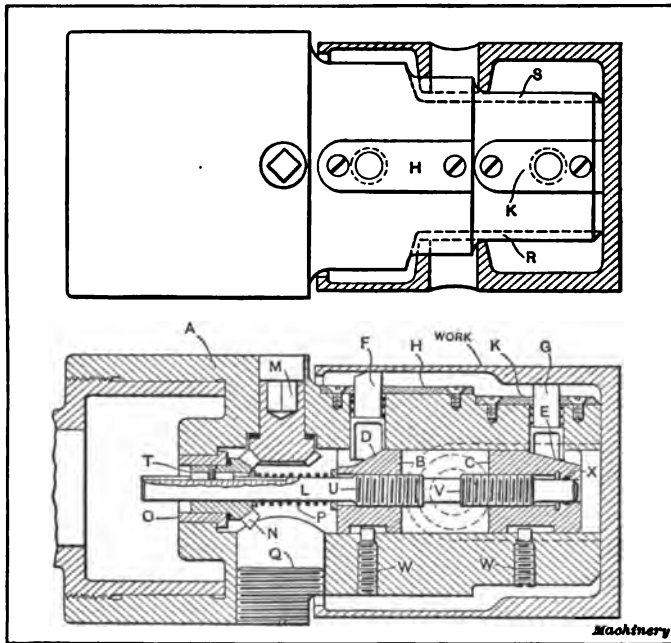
Special Chuck for Holding Gas Engine Pistons Internally
